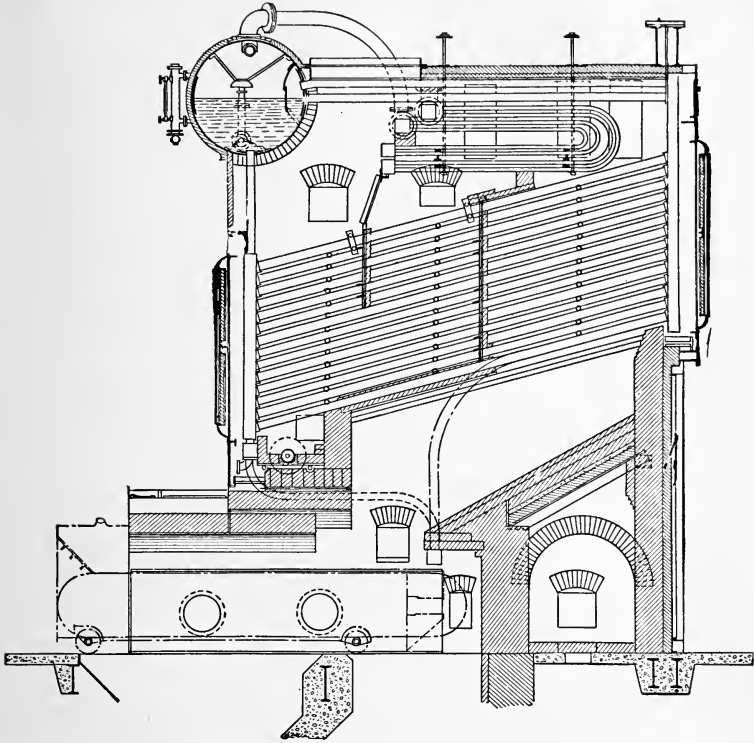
Babcock & Wilcox Boiler — Cross Drum Type.
